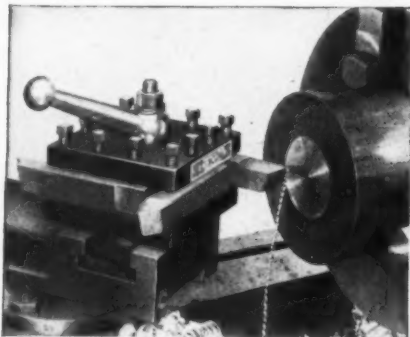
$\frac{3}{4}$ " square bit mounted in Model  $4\frac{1}{2}$ " S turret used to face work. Same tool is indexed to position and used for turning as shown below.
